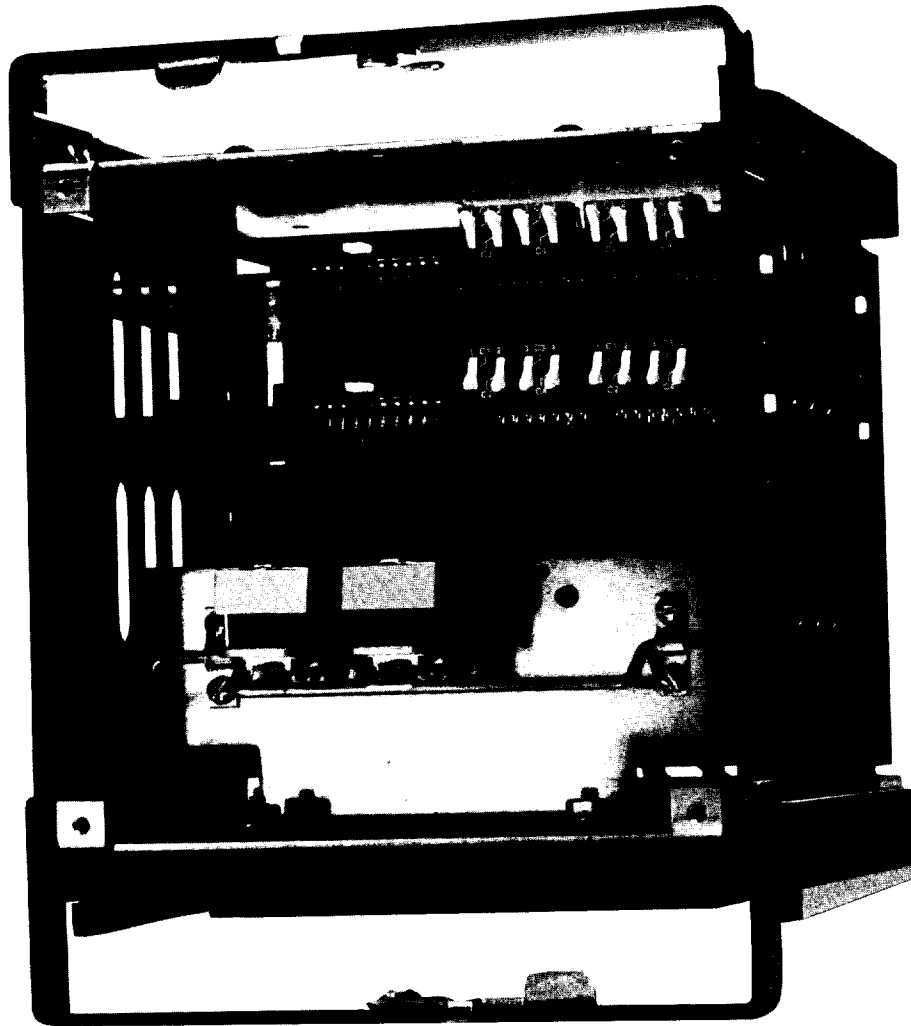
(8043823) Typical "S1" Cradle Assembly With Nameplate Removed
